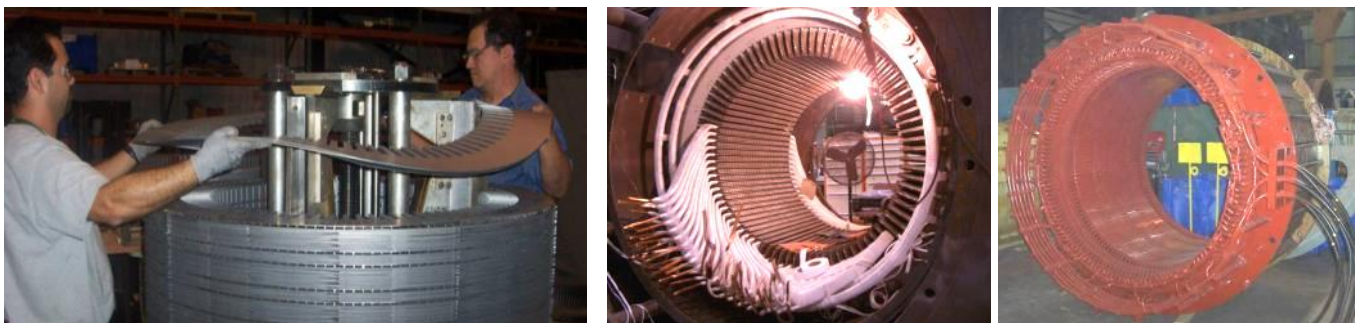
Core Stacking Process (left), Installing Copper Winding inside the Core (center), and Stator Core after Impregnation (right)
